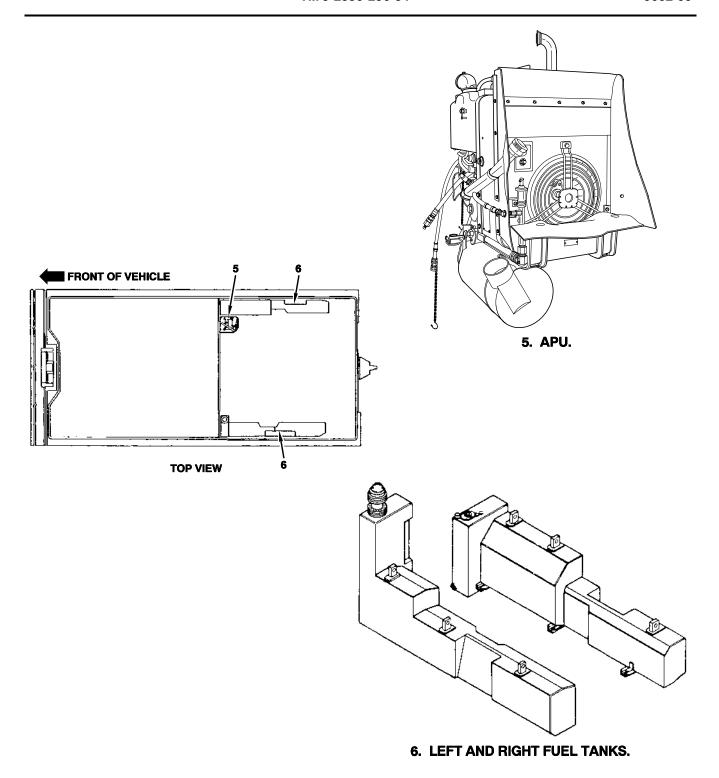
Location of Major Components, Assemblies, and Auxiliaries (Sheet 2 of 8).
